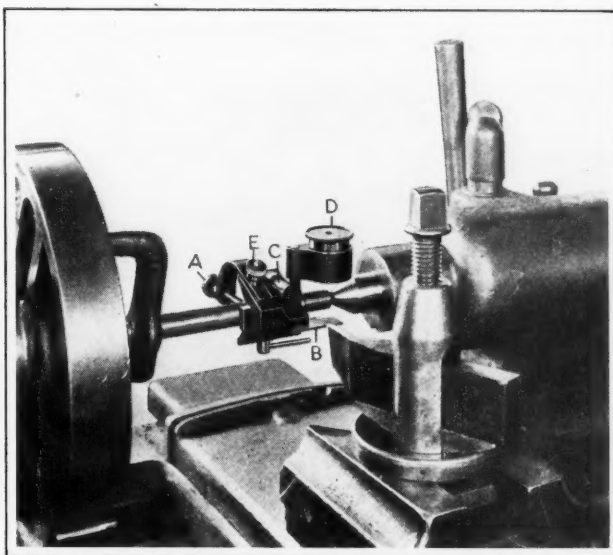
Optical Instrument used in setting a Thread Tool accurately Relative to the Axis of the Work and in checking the Shape of the Tool Point
